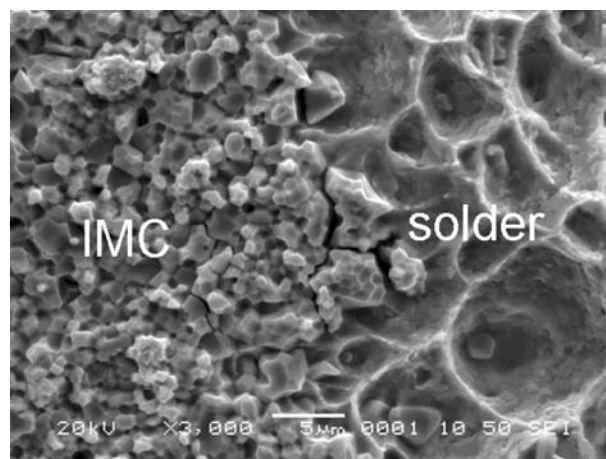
Fracture surfaces in Sn-3.5Ag/Ni-P solder joints aged at 170°C for 400 h. The figure shows the transition of fracture from dimpled Ni_3Sn_4 /solder interface to intergranular cracking inside the Ni_3Sn_4 IMC layer.
